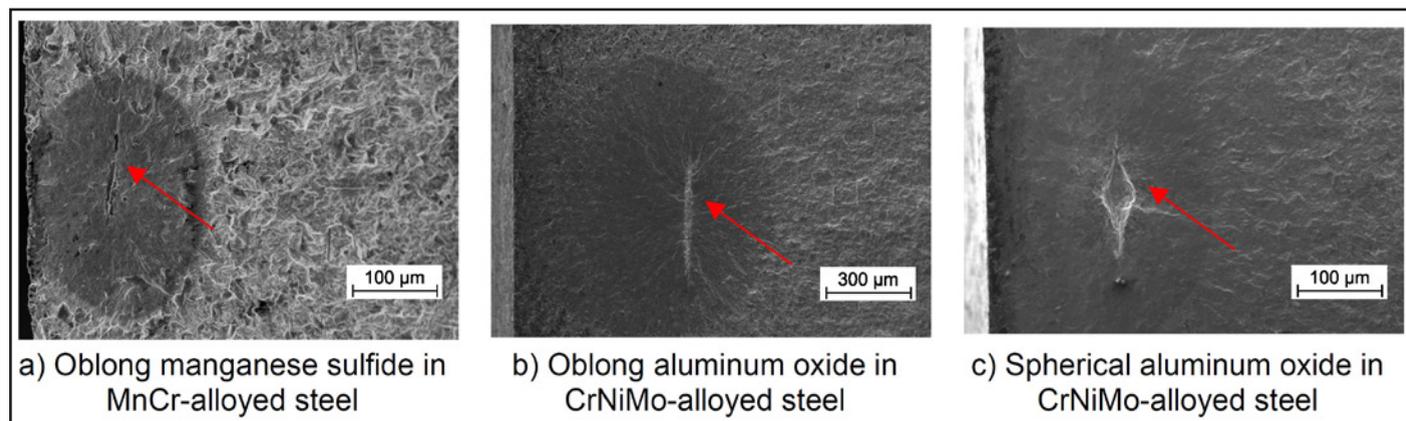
Typical nonmetallic inclusions in fisheye fracture surfaces of gear steels.
